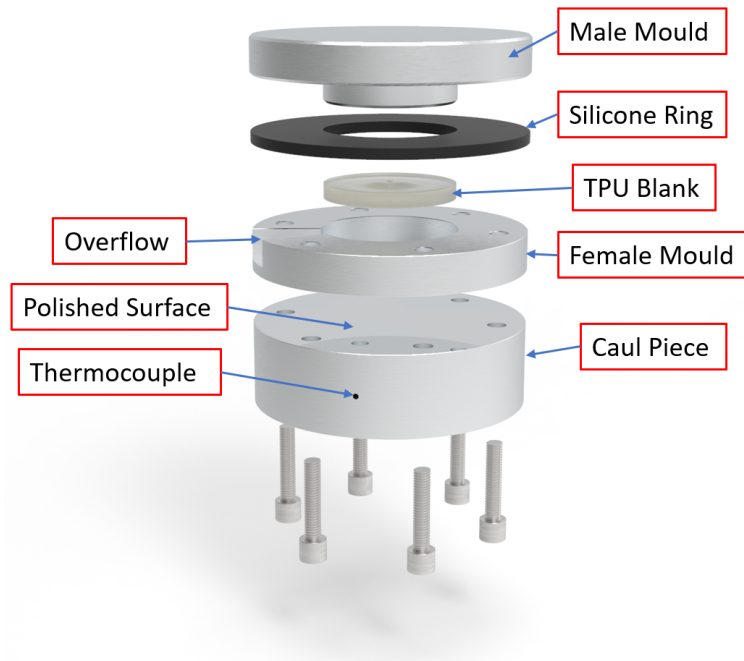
Moulding setup for the thermoplastic processing. The bolts on the bottom were used to ensure a tight connection between the caul piece and female mould.
